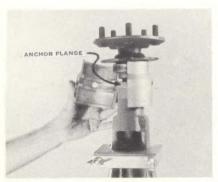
Installing head for pulling Ford bearing—49 through 56. NOTE: center groove around anchor flange, and hole in center of head over pin in flange at top of press.
